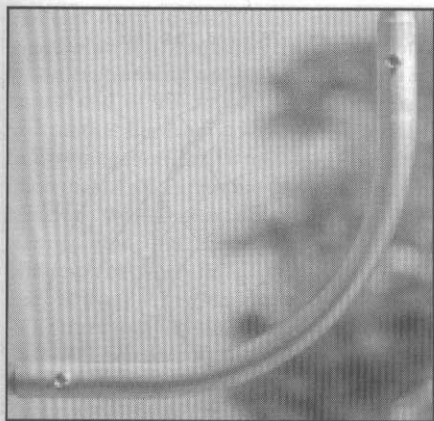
A close-up of the corner assembly. The 7/8-inch diameter corner piece makes a good fit over the 3/4-inch diameter straight pieces and requires only a single fastener at each end (with a light coat of "Penetrox A" at the joint).
